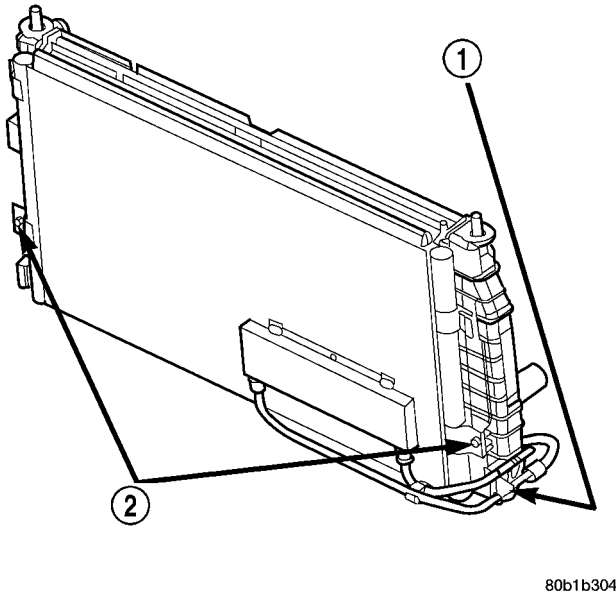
A/C CONDENSER TO RADIATOR - 2.7L w/o AUTO STICK
